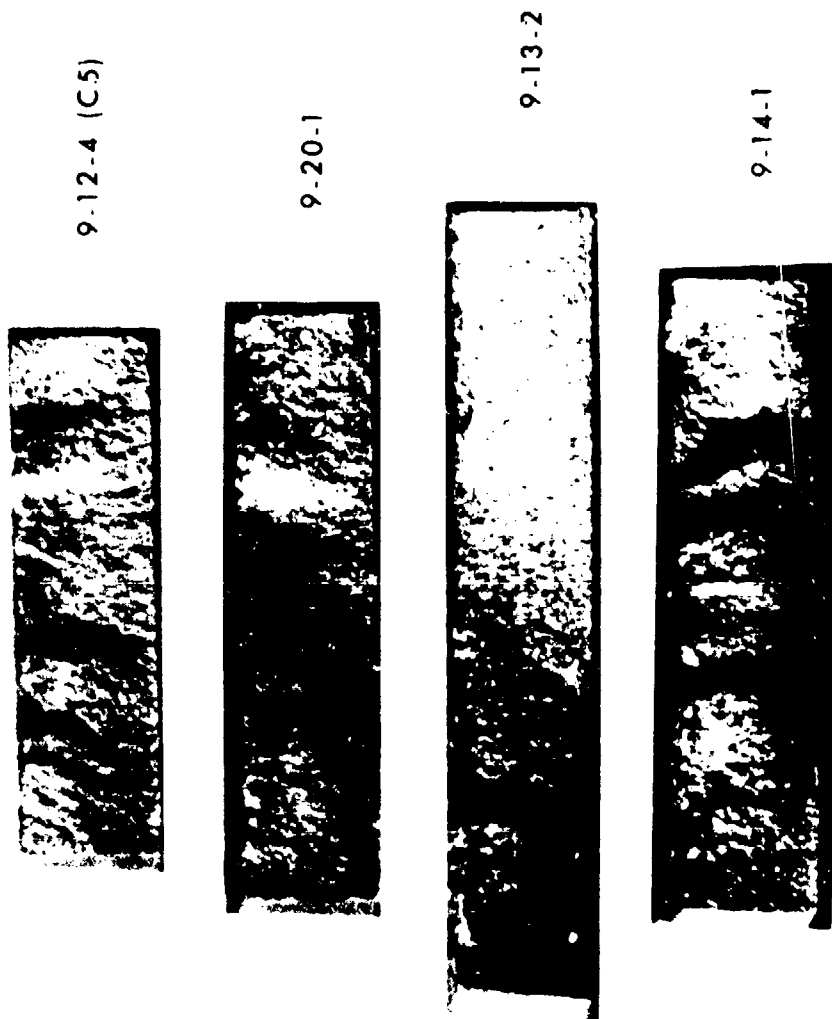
Fracture Surfaces of the Salt Fog Exposure Specimens of Figure 52, With HAF Coating.
